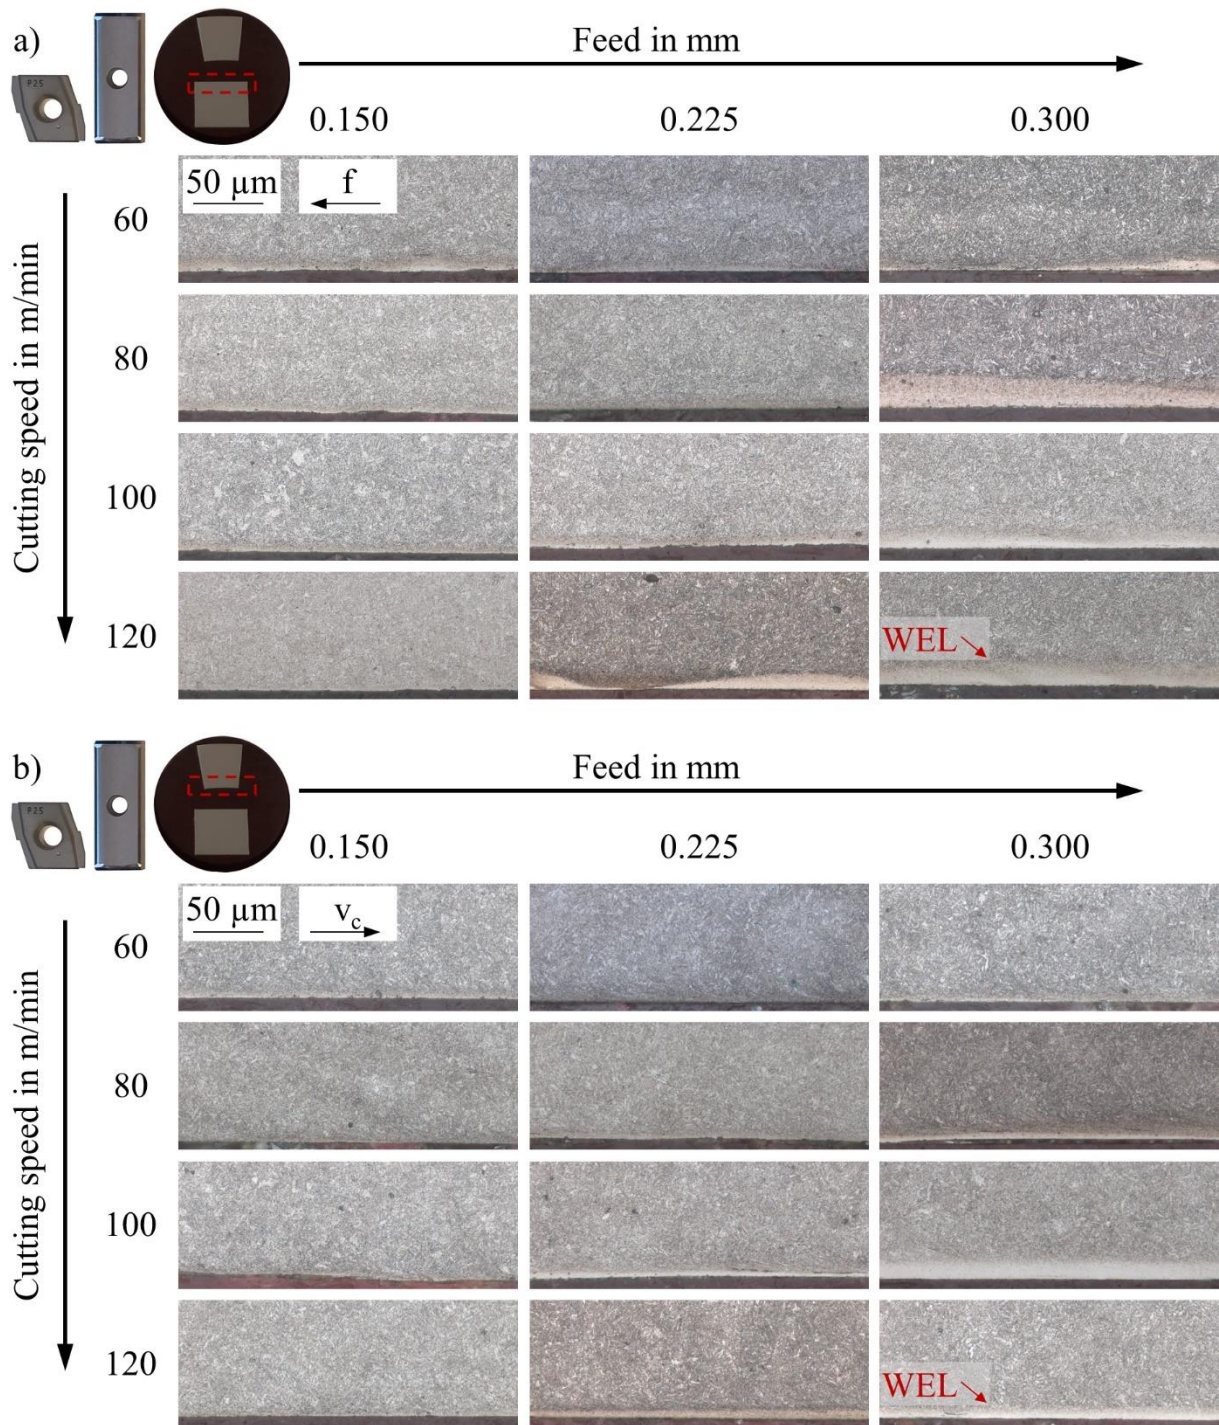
Micrographs of the surfaces of the bores machined with uncoated cutting edges and guide pads: a) longitudinal sections, b) transverse sections
